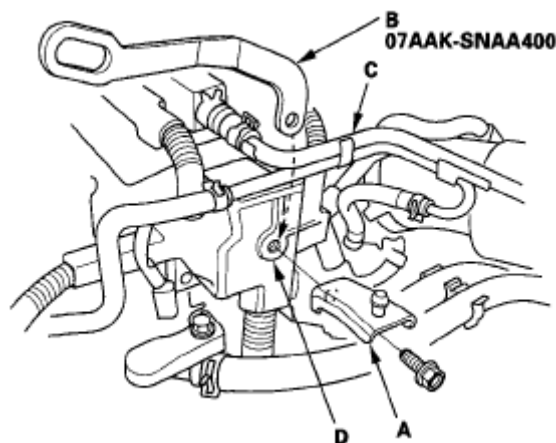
Identifying Mounting Bracket And Support Eyelet
